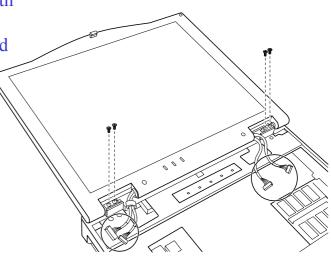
Unplugging the LCD Connectors and Removing the Hinge Screws
